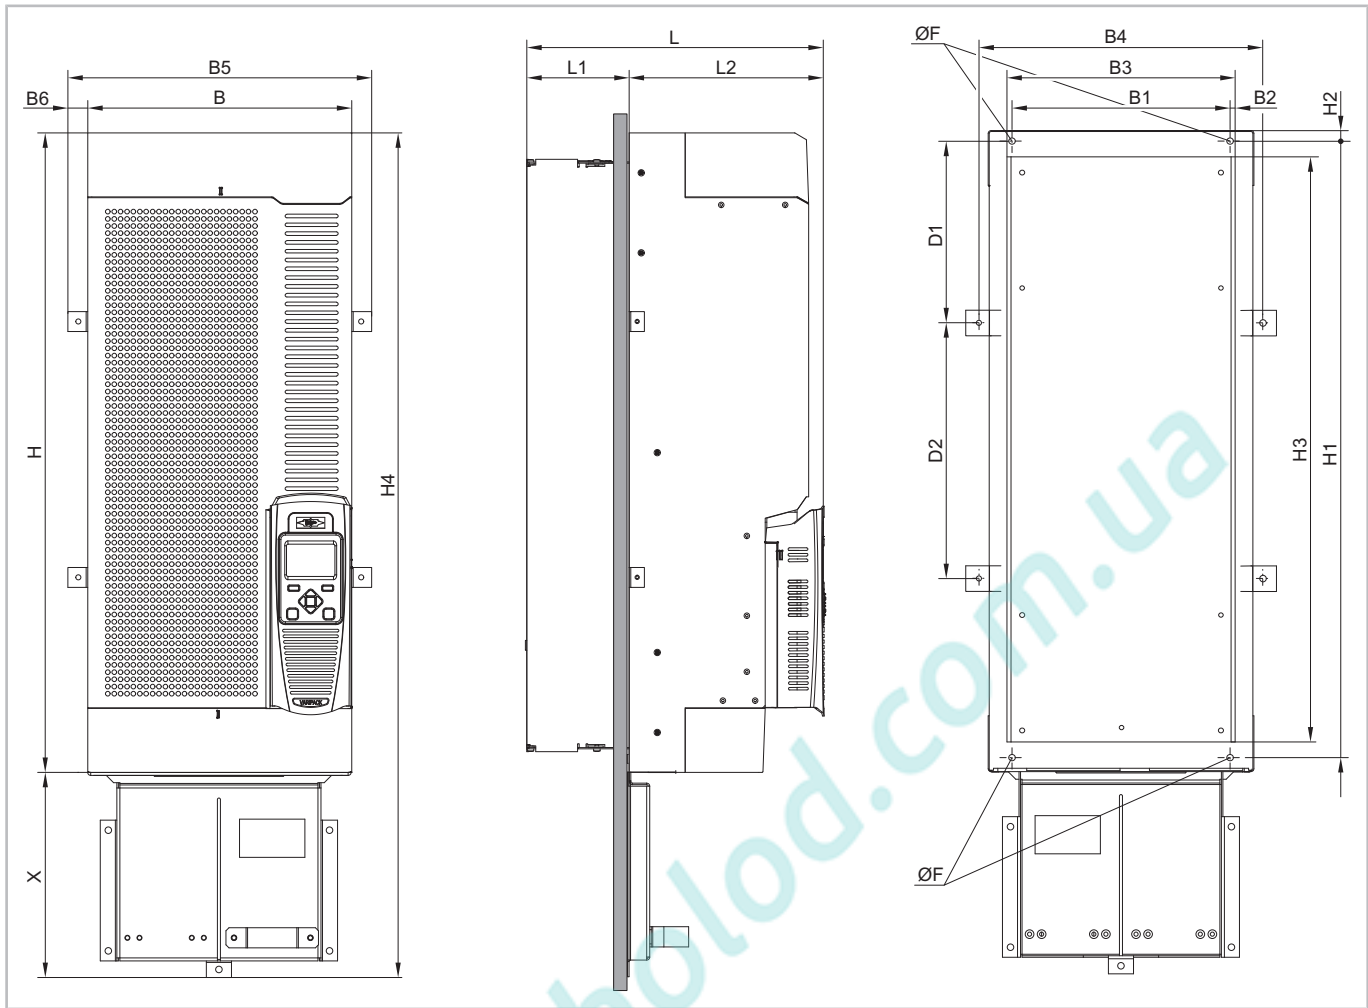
Dimensional drawing FJU+87 .. FKU+260 for through-switch cabinet mounting (with optional control panel)
